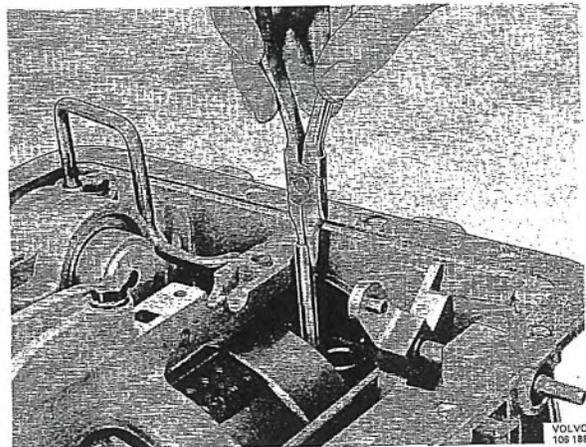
Removing converter inlet and outlet tubes using needle-nose pliers
